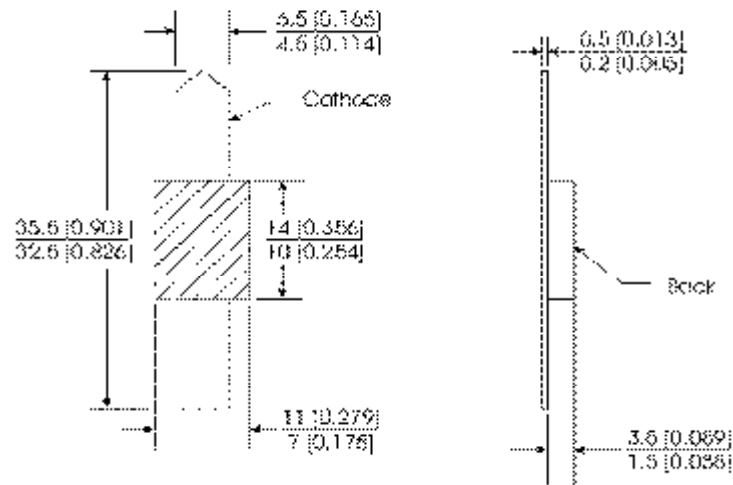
Metelics' PIN diode package outline dimension in mils (mm)
